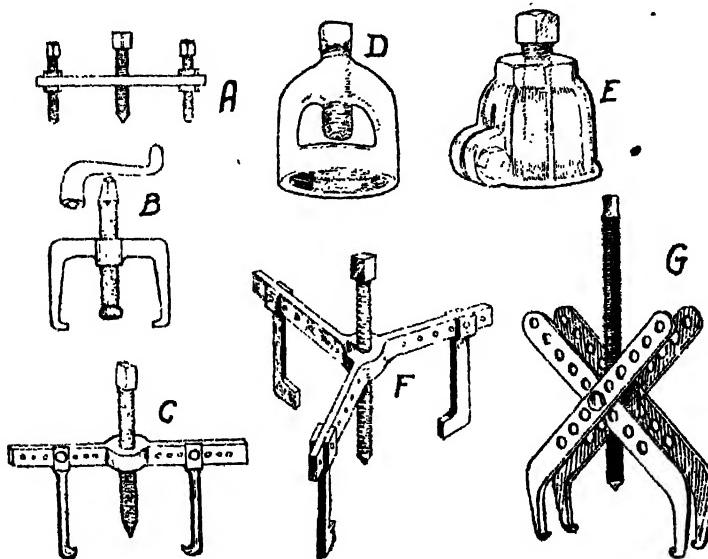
Showing Construction of Wheel and Gear Pullers.
